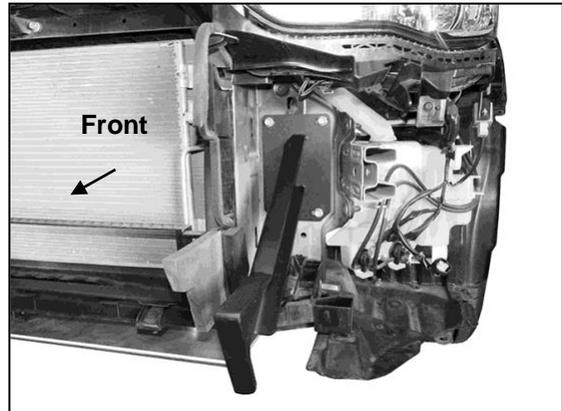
Remove factory hex bolts to remove bumper reinforcement (arrows)
